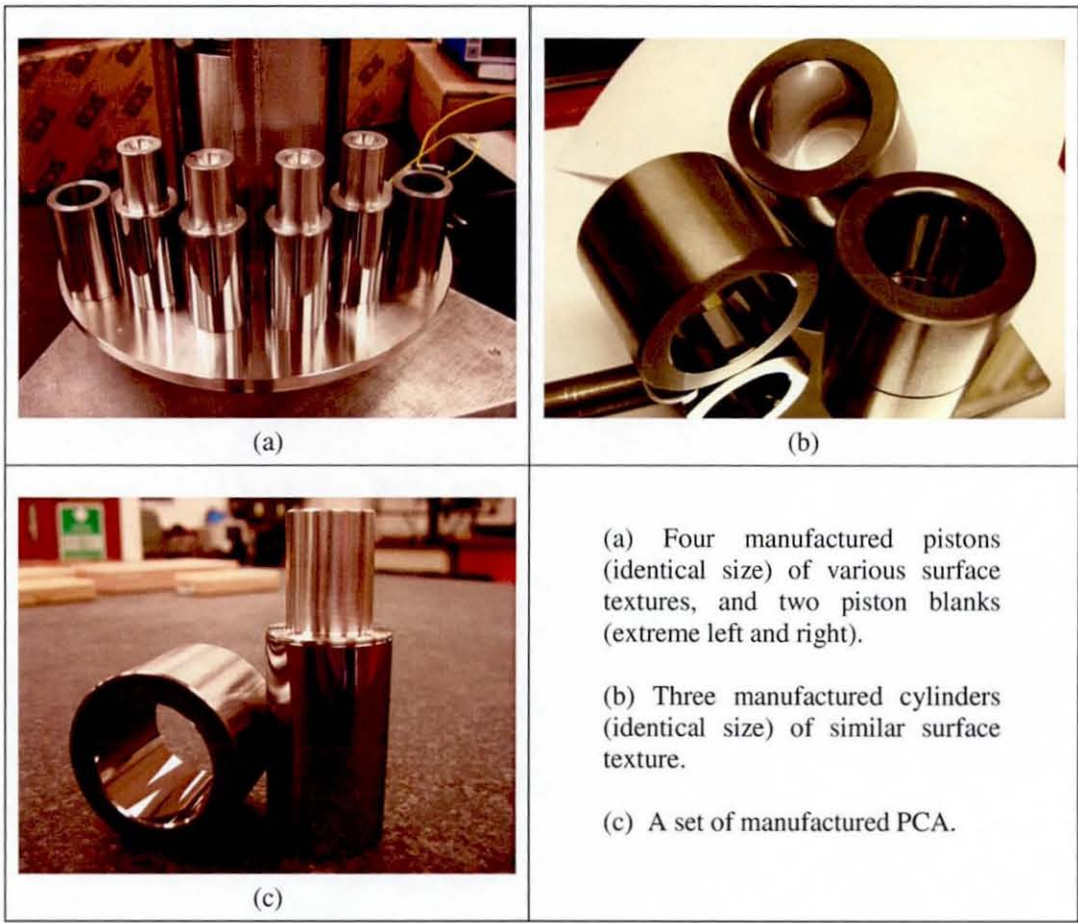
Manufactured tungsten carbide pistons and cylinders
